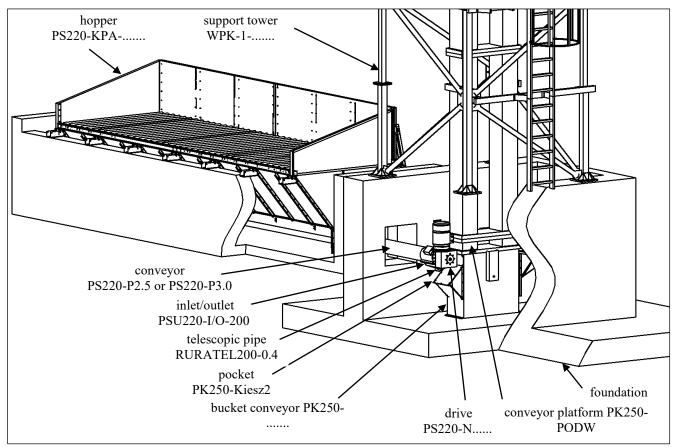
Transport of material from the inlet hopper through the bucket conveyor - an example
